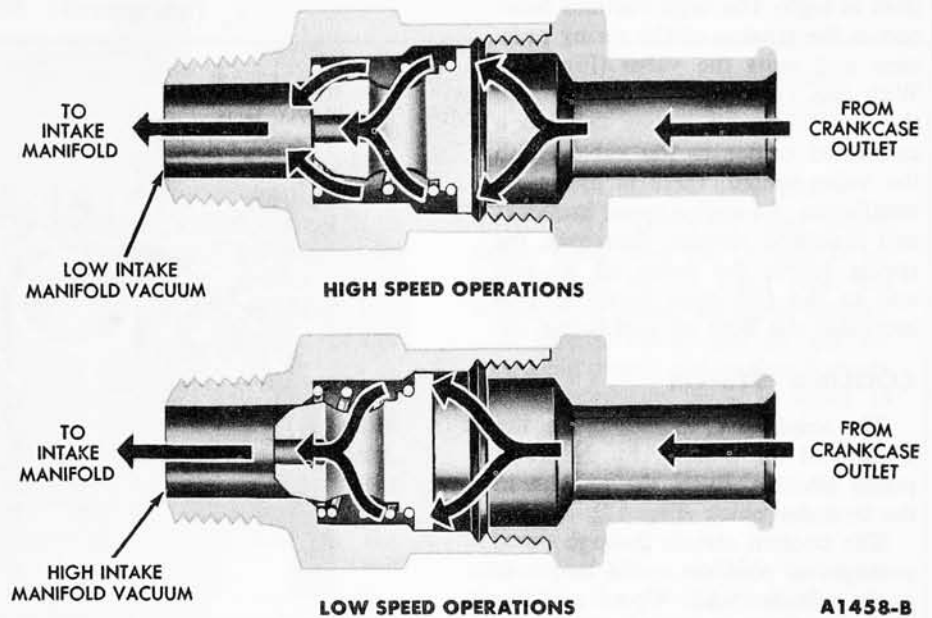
Positive Crankcase Ventilation Regulator Valve
